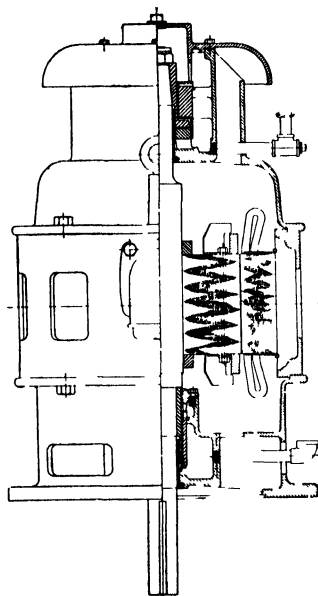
Cross-section of vertical squirrel-cage motor.
